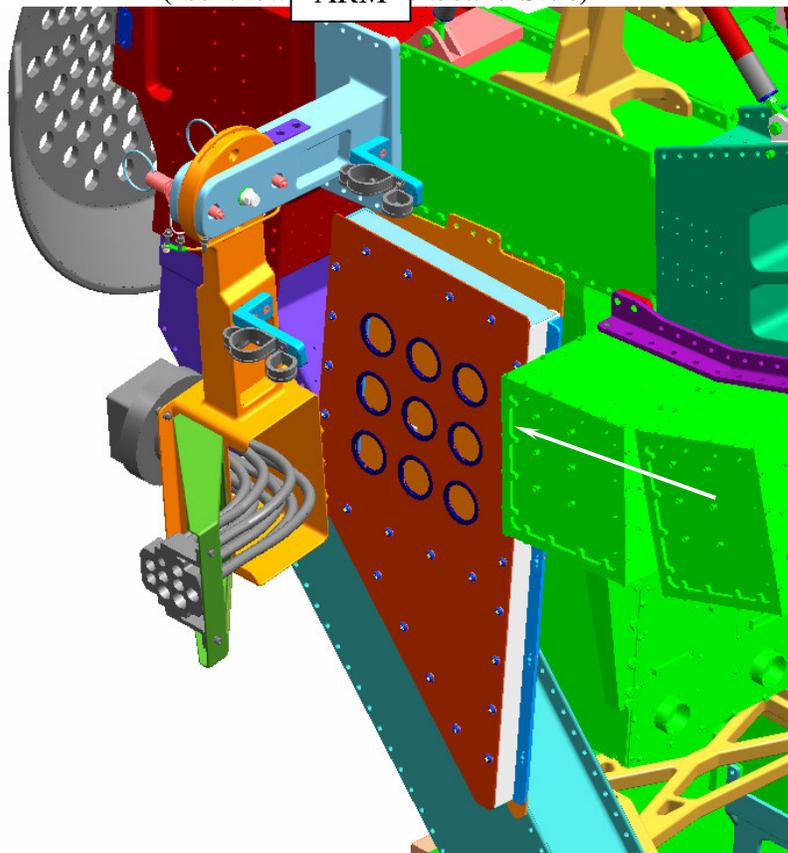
ROEU Foldable Bracket Assembly Folded Configuration
